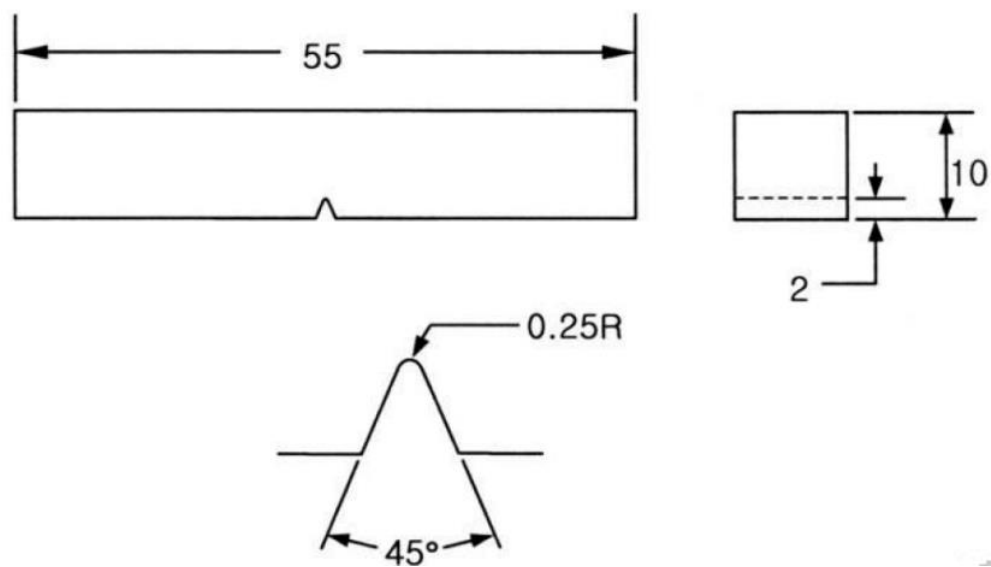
Shape and dimensions of the Charpy impact test specimen
